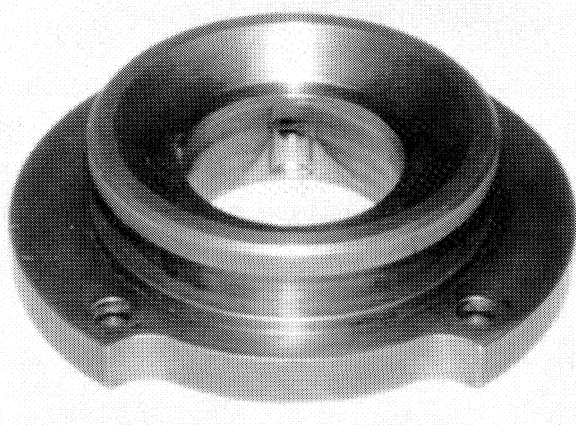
Photograph of Original Three-Lobe, Expander-End Journal Bearing.
